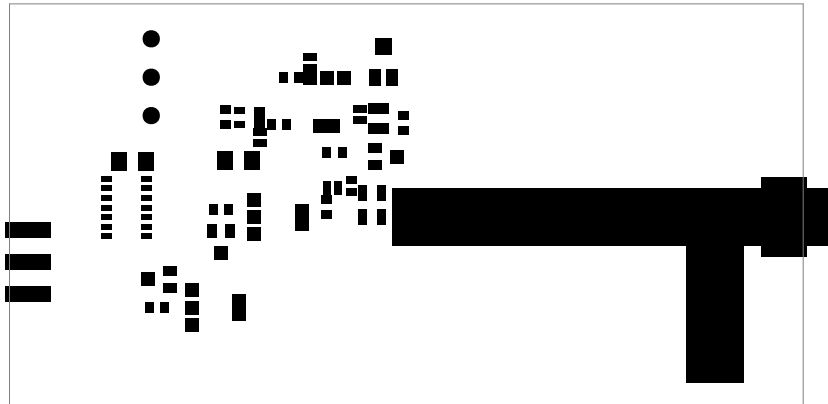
Top solder mask layer for pulse generator revision 4 (4mm).
